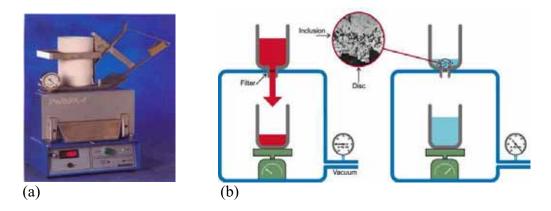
(a) PoDFA equipment [11]: the molten metal is poured in a crucible and placed on top of the vacuum chamber; (b) schematic illustration of the process: the metal is sucked by the vacuum and forced to flow through the porous filter disc which is cut and prepared for the microscopy investigation.
